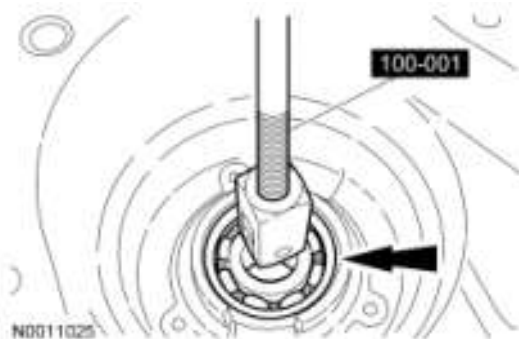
Locating Rear Output Shaft Support Bearing And Special Tool
